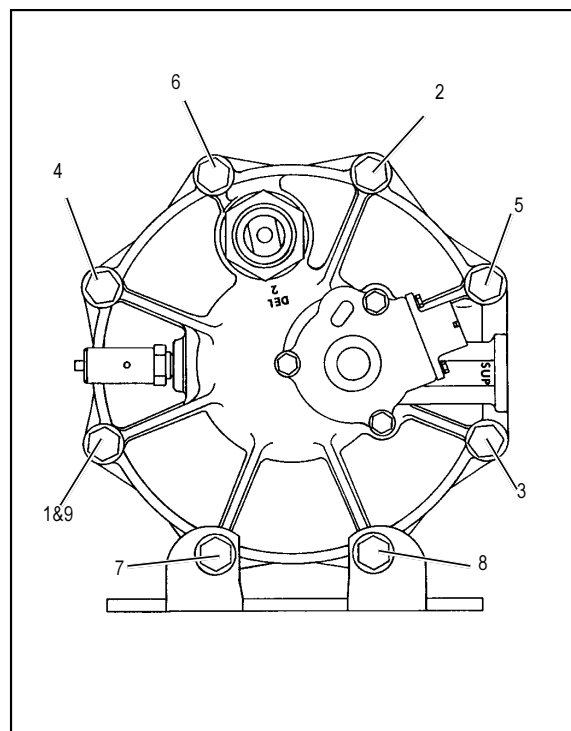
END COVER TO HOUSING TORQUE PATTERN
